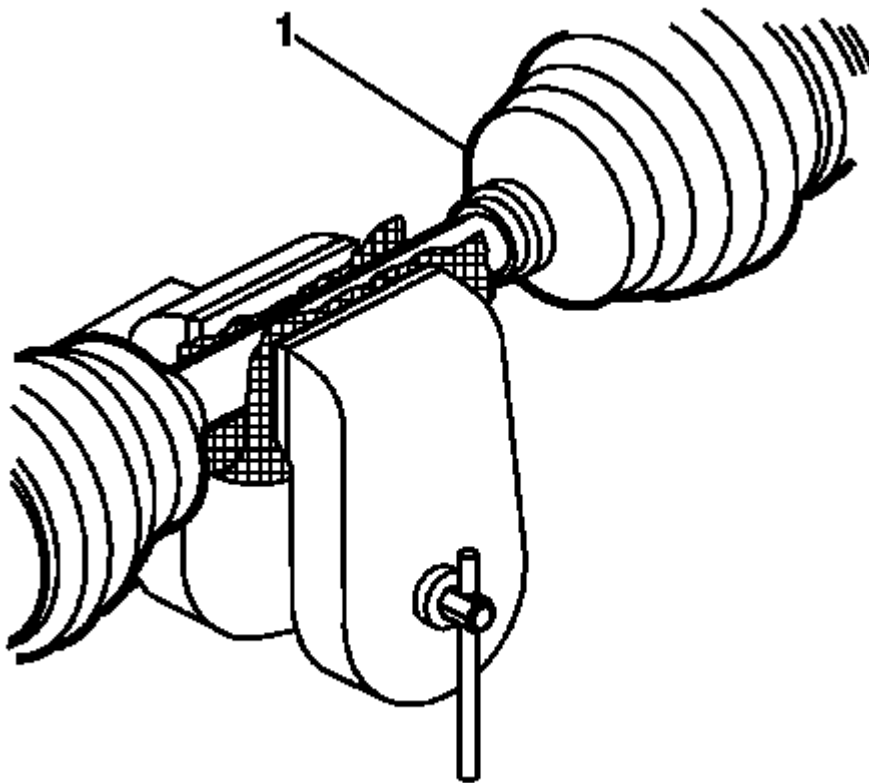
View Of Front Wheel Drive Shaft Inner Joint
